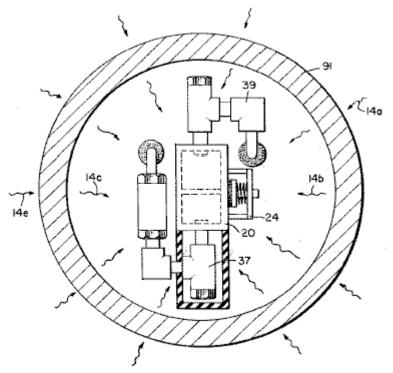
is a cross-sectional side view of the fuel injector system in the present invention. Fig. 6.
